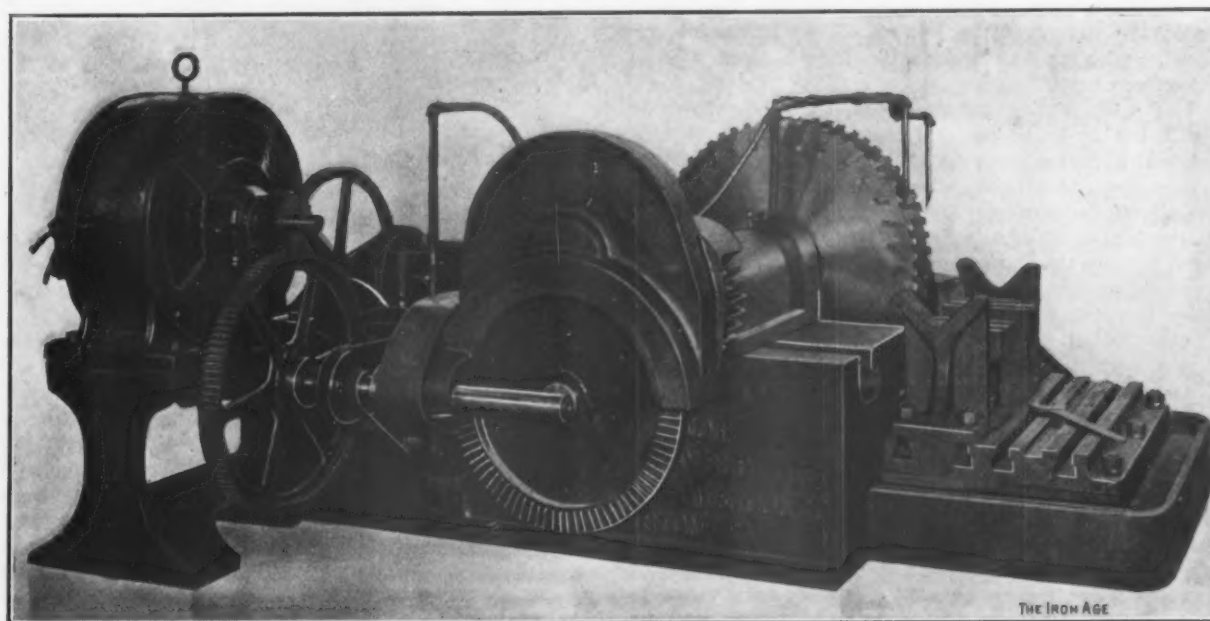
View of the Opposite Side of the Tindel Double Rotary Slotting Machine, Showing the Motor Drive.
